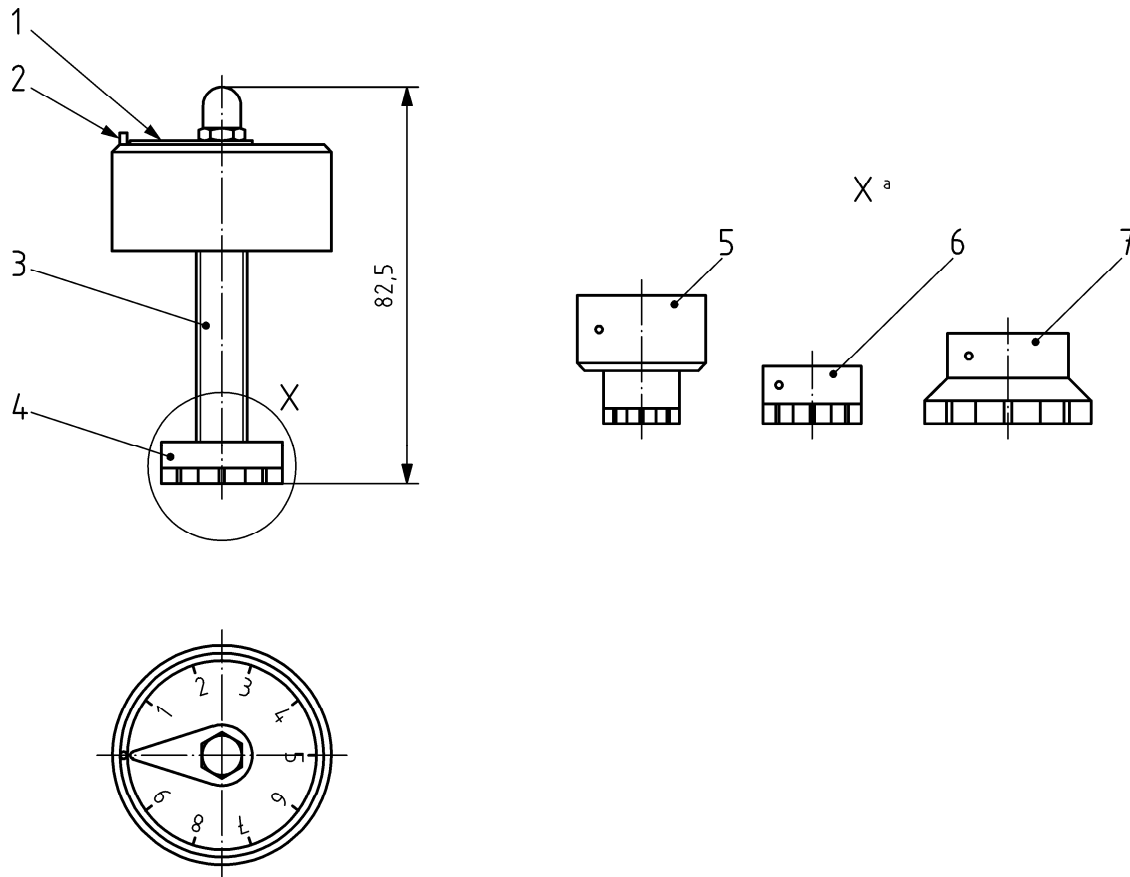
Vane torque spring, electrical transducer details geometry, miniature vane blade geometry [34]
